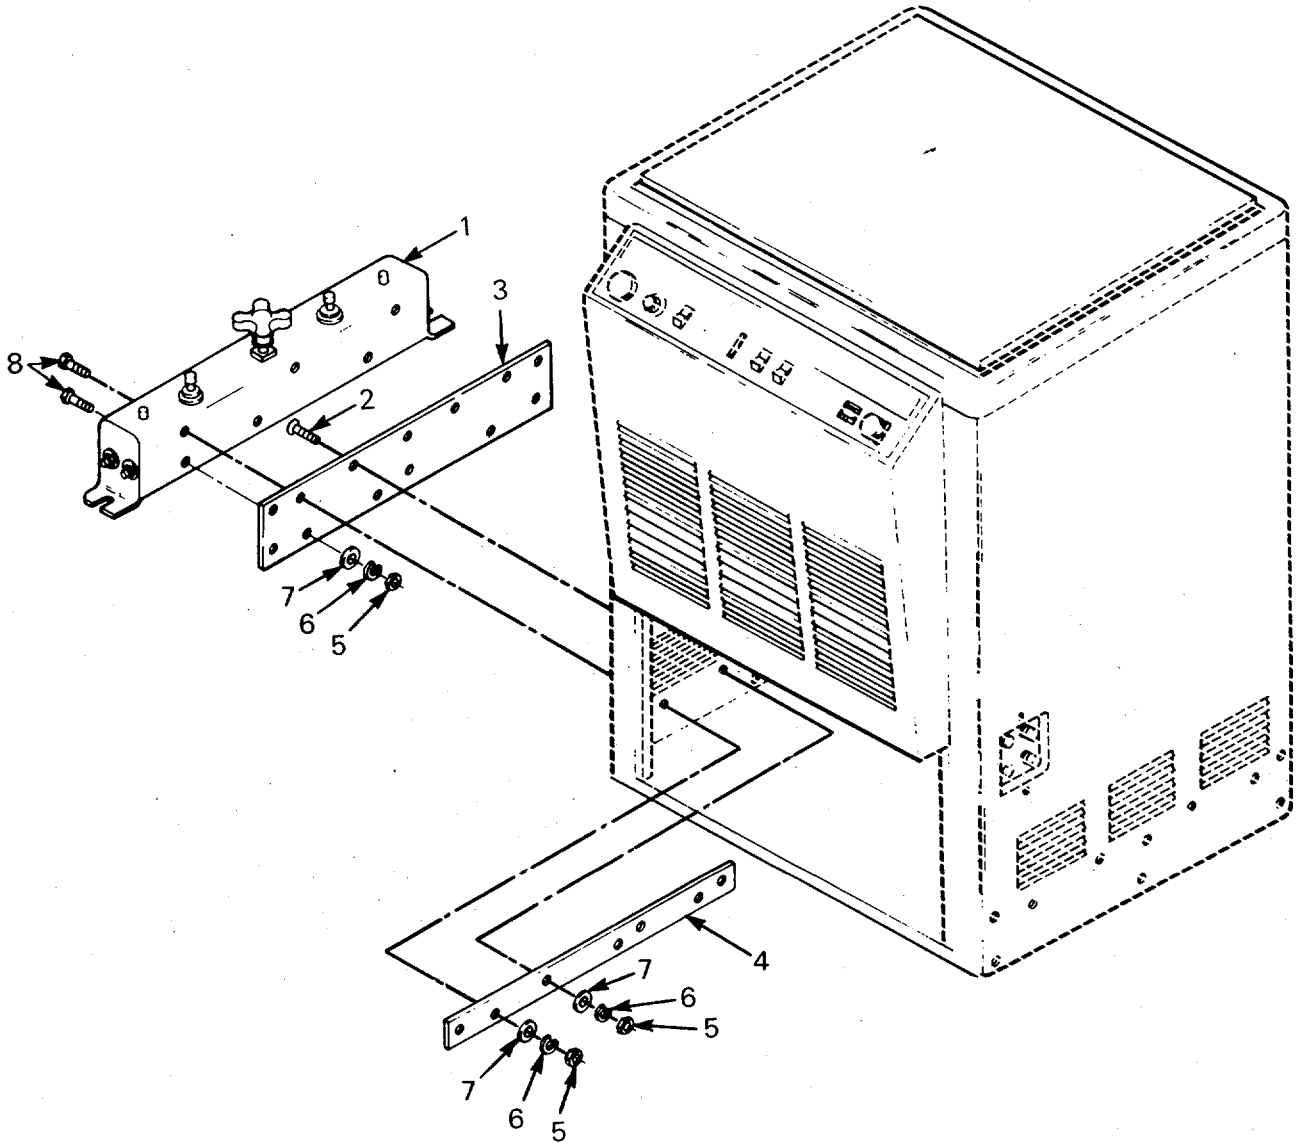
Flip-Top Platemaker (sheet 1 of 2)
